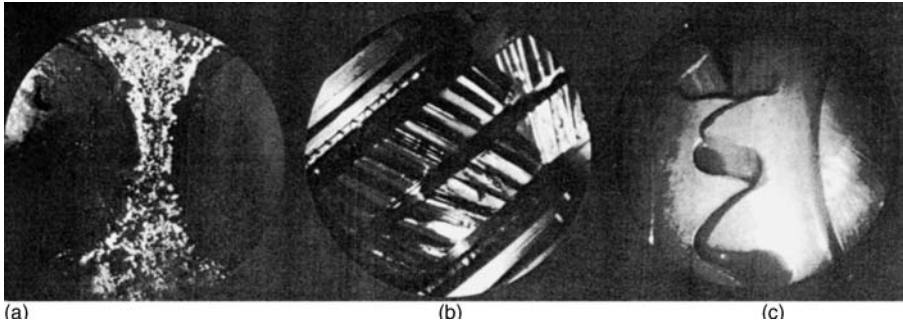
In-service defects as seen through a borescope designed for automotive servicing. (a) Carbon on valves; (b) broken transmission gear tooth; (c) differential gear wear. Courtesy of Lenox Instrument Company. (Reprinted with permission from ASM International. All rights reserved www.asminternational.org)
